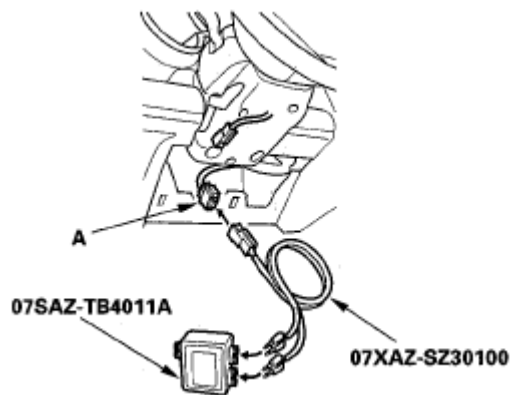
Identifying Dashboard Wire Harness B 4P Connector
